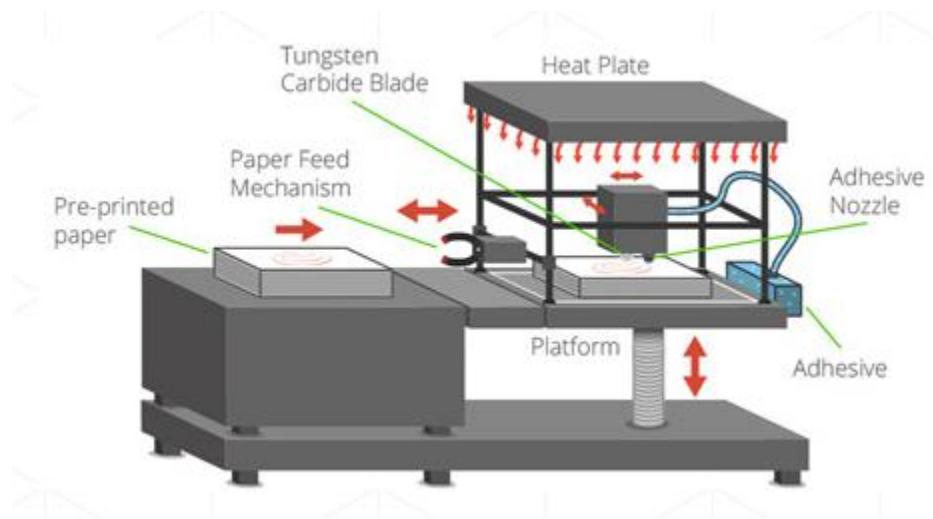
LOM Paper Sheets Setup (3dprintingindustry.com).
